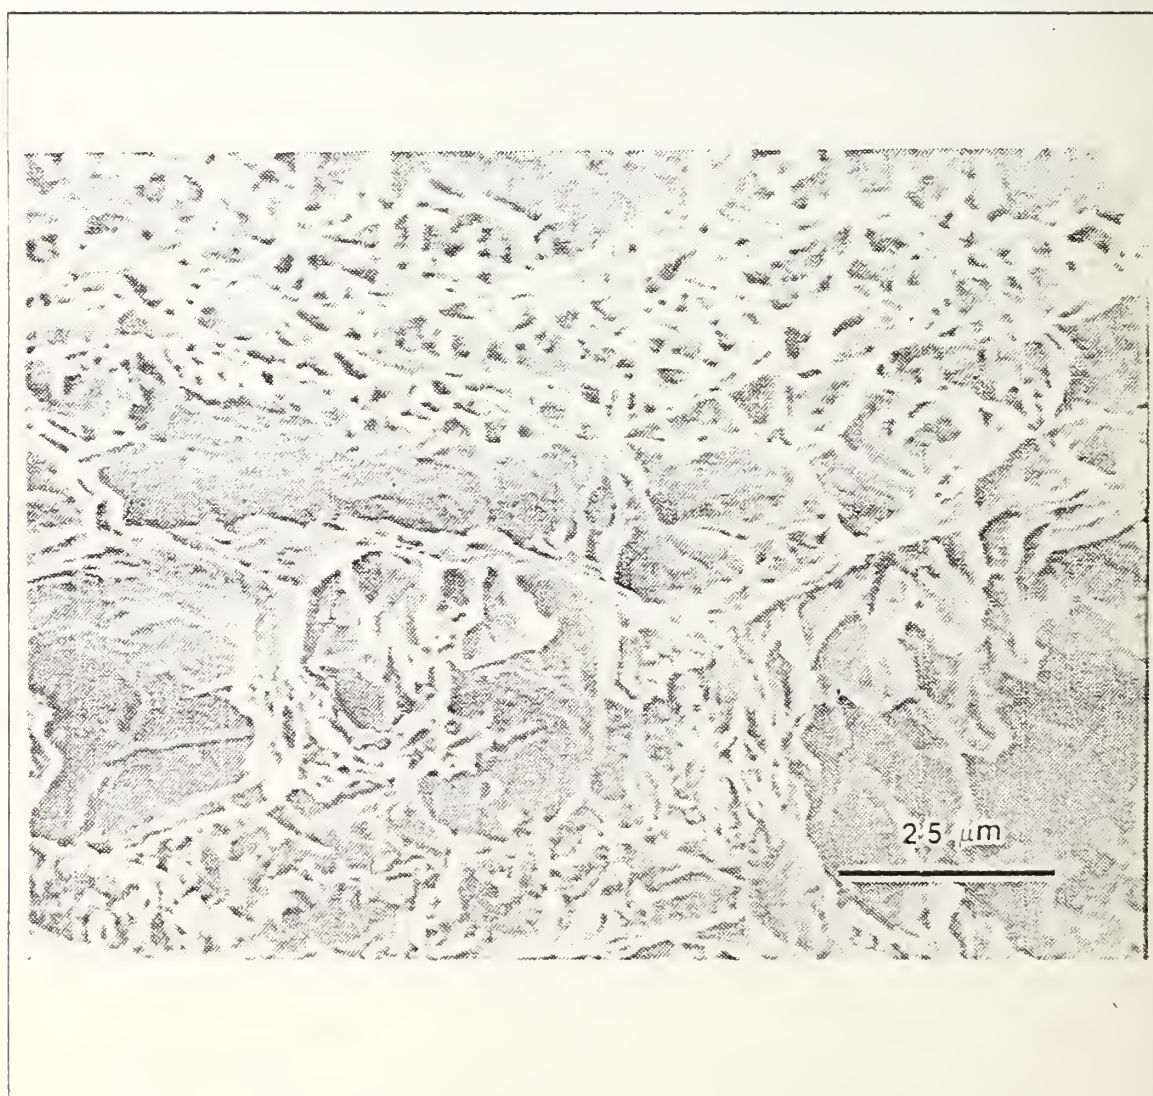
Fracture Surface for Tensile Specimen of
